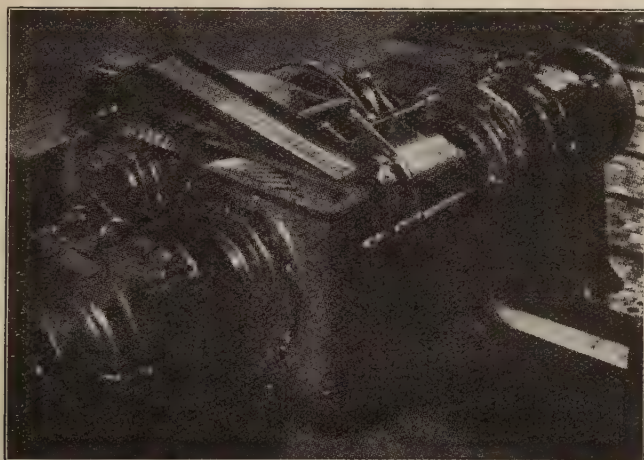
Axle generator used in the air-conditioning system of the Westinghouse Electric & Manufacturing Company. — The cover of the gear case is removed.
